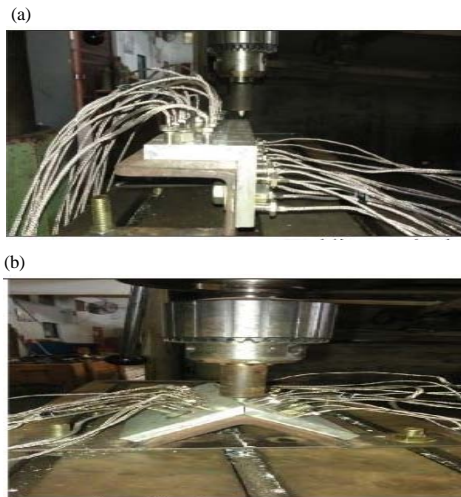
a) Welding method Position 1 and and b) Position 2
